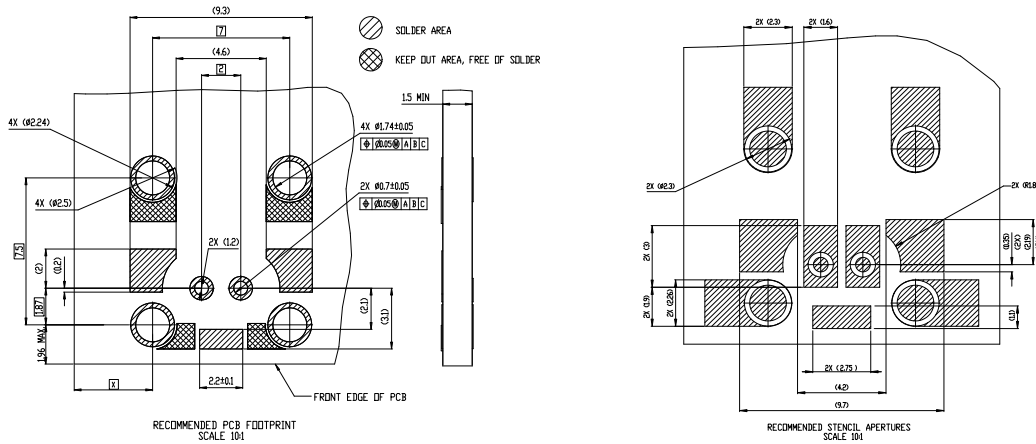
/ Pin Header 1P 90° sealed, TE-No. 2397320
